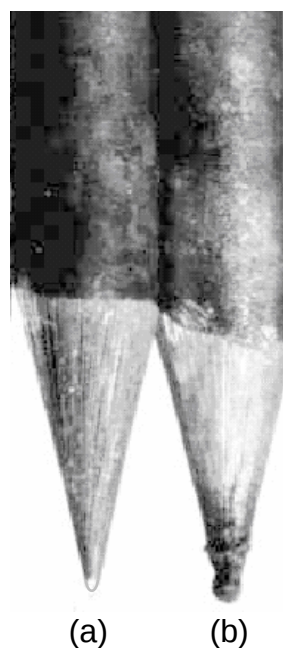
Electrodes for TIG torch; (a) unused tip, (b) contaminated electrode used on oxidized plate. After Millington [4].
